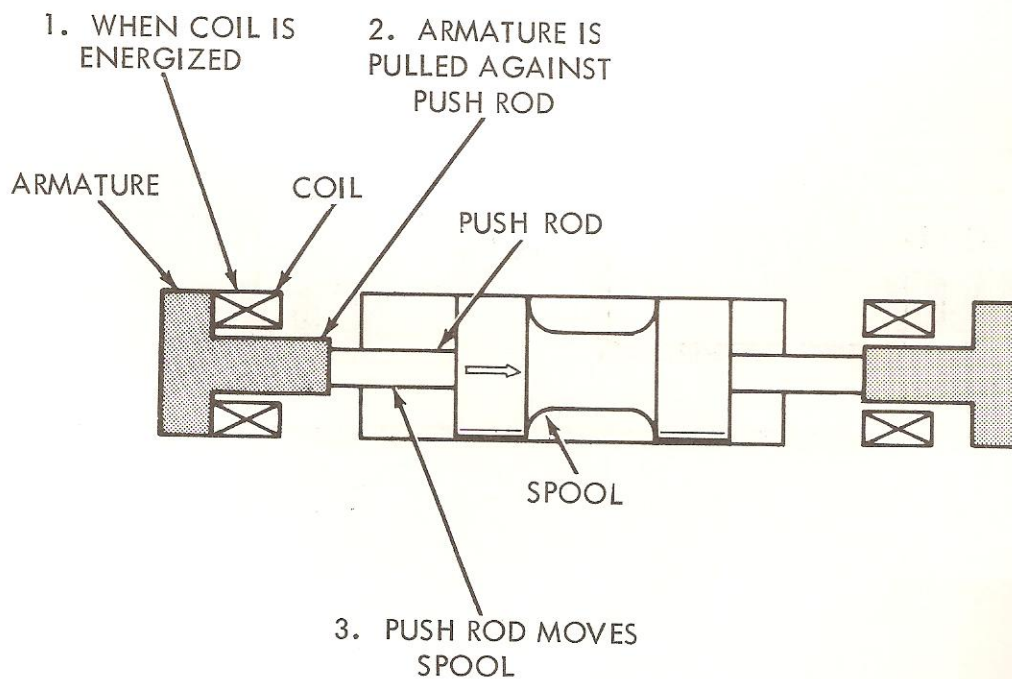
Push-Type Solenoids Shift Many Small Valve Spools
